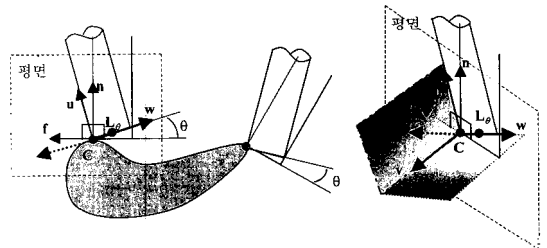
Cutter location for 5-axis flat-end cutter (heel angle > 0).
